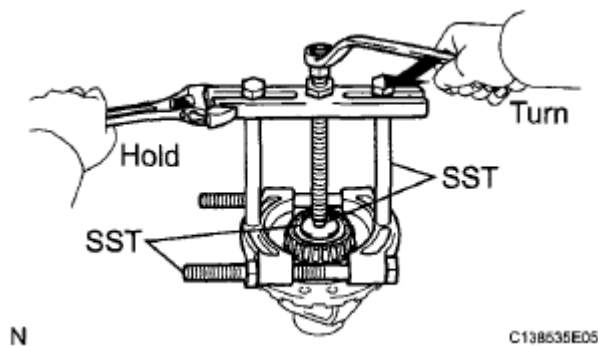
Removing Front Differential Case Rear Tapered Roller Bearing From
